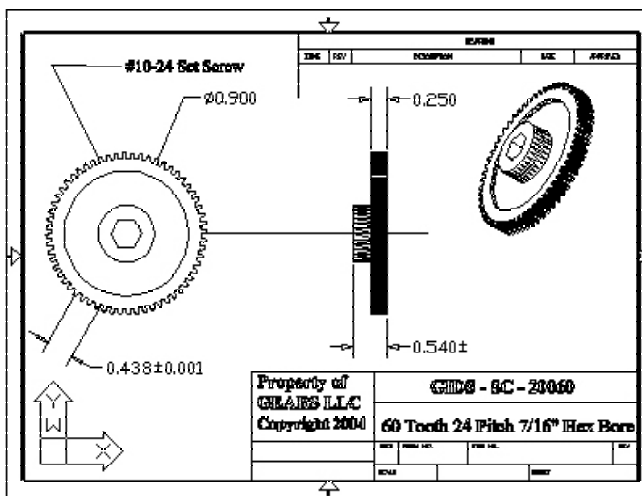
Working Drawing of a Spur Gear
